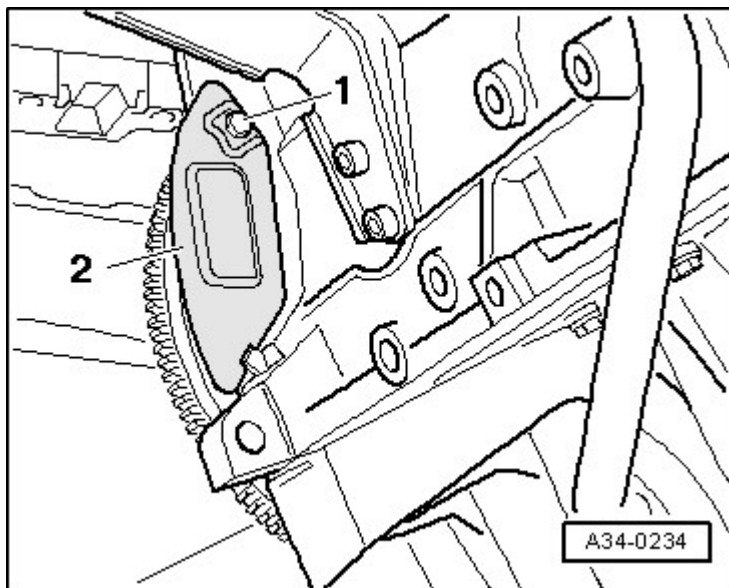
Removing/Installing Bolt & Small Cover Plate
